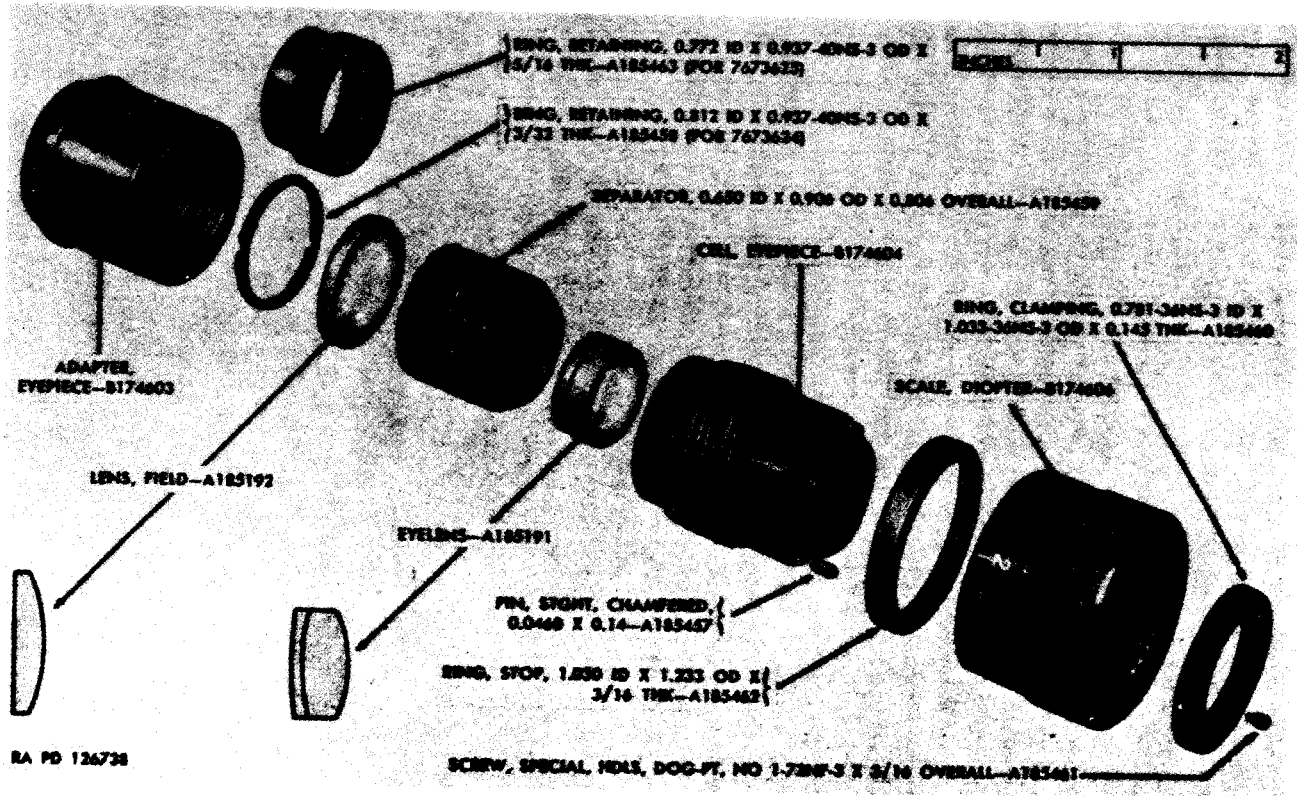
Eyepiece assembly 7673624 (left) or 7673625 (right) — exploded view.
